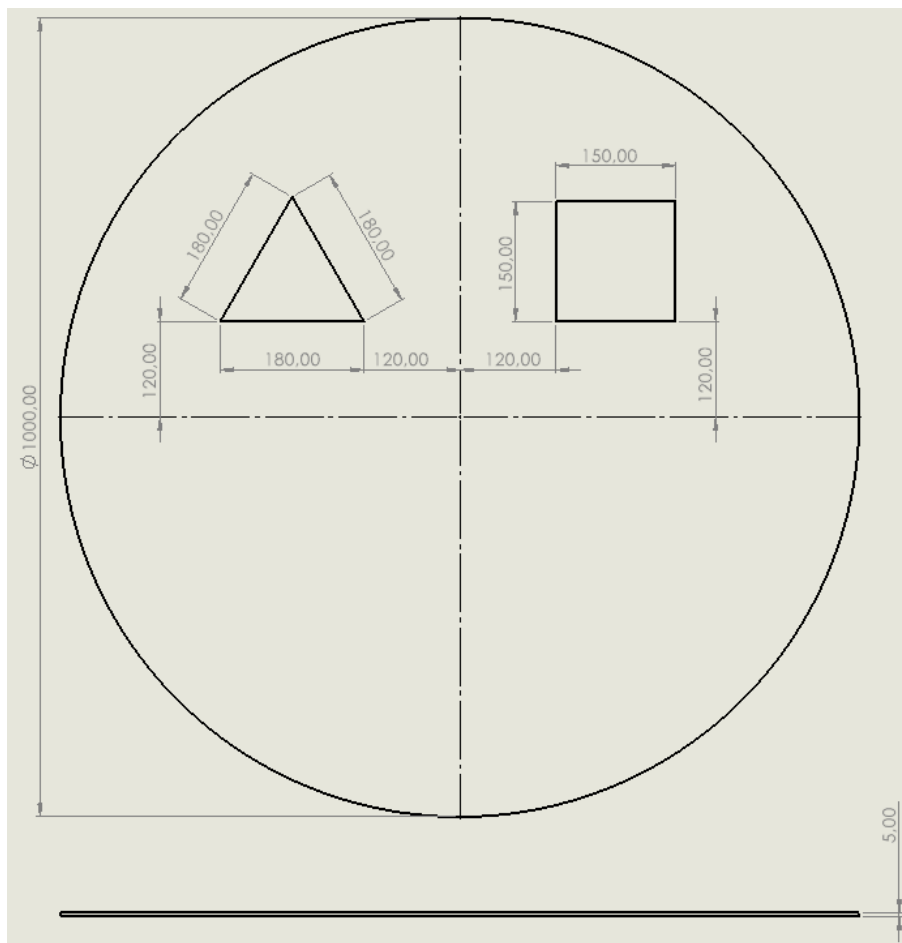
Top view technical dimensions of the platform (in millimeters)
